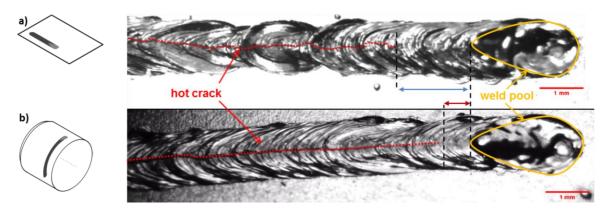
(a) Image of a high speed sequence of flat sheet welding with the hot crack marked as dashed red line. The blue arrow defines the distance of crack visibility and weld pool end. (b) Image of a high speed sequence of formed cup welding with the hot crack marked in as dashed red line. The red arrow defines the distance of crack visibility and weld pool end.
